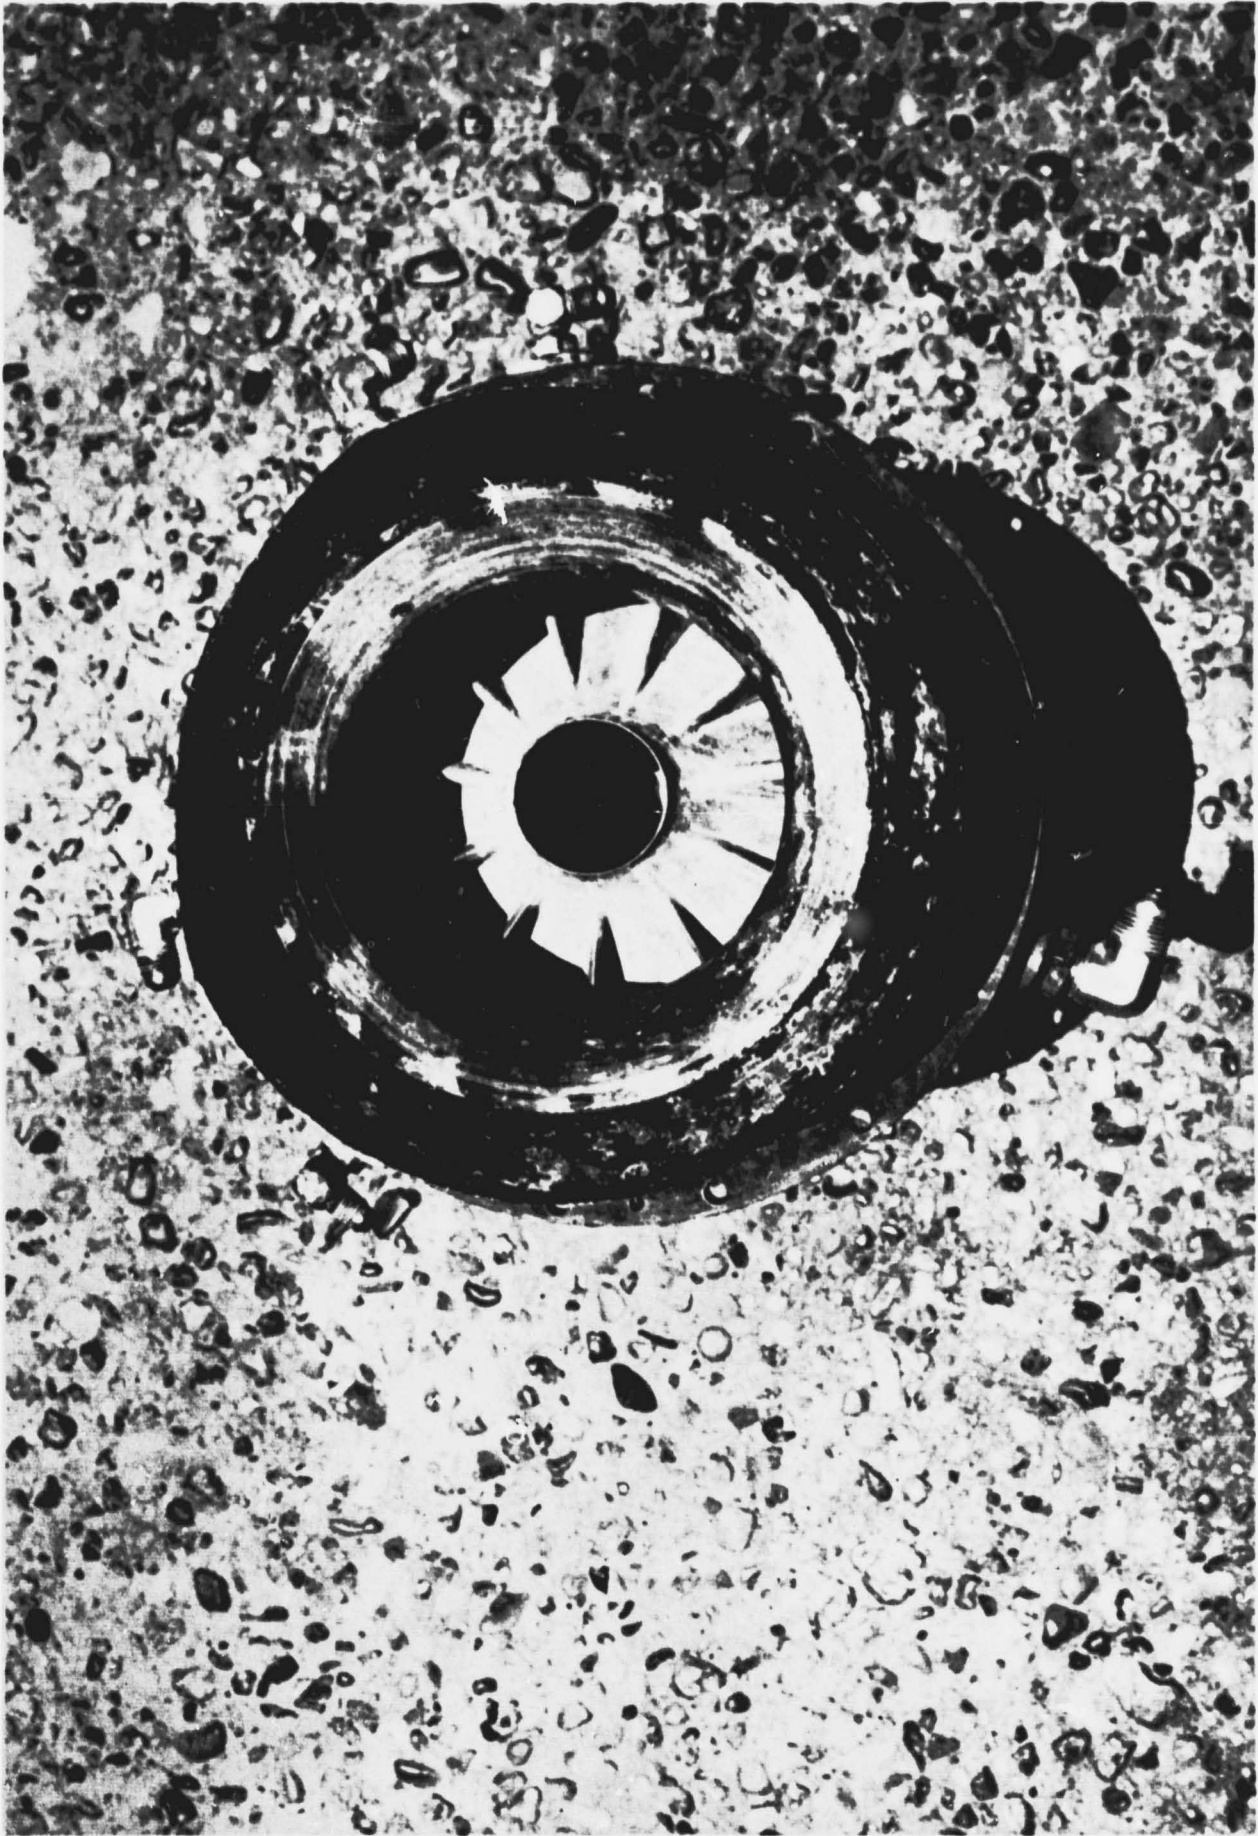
INDUCER HOUSING, MAIN IMPELLER SHROUD
